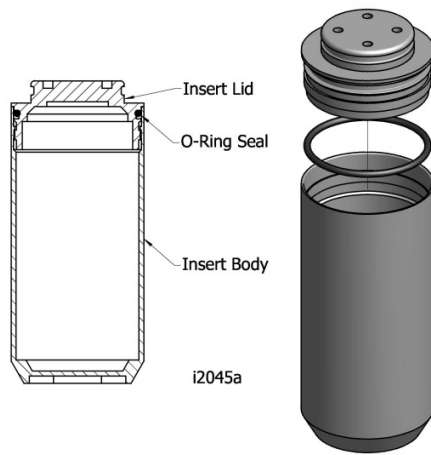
Shielding insert HS-50x128-SS Insert Design # 4081
